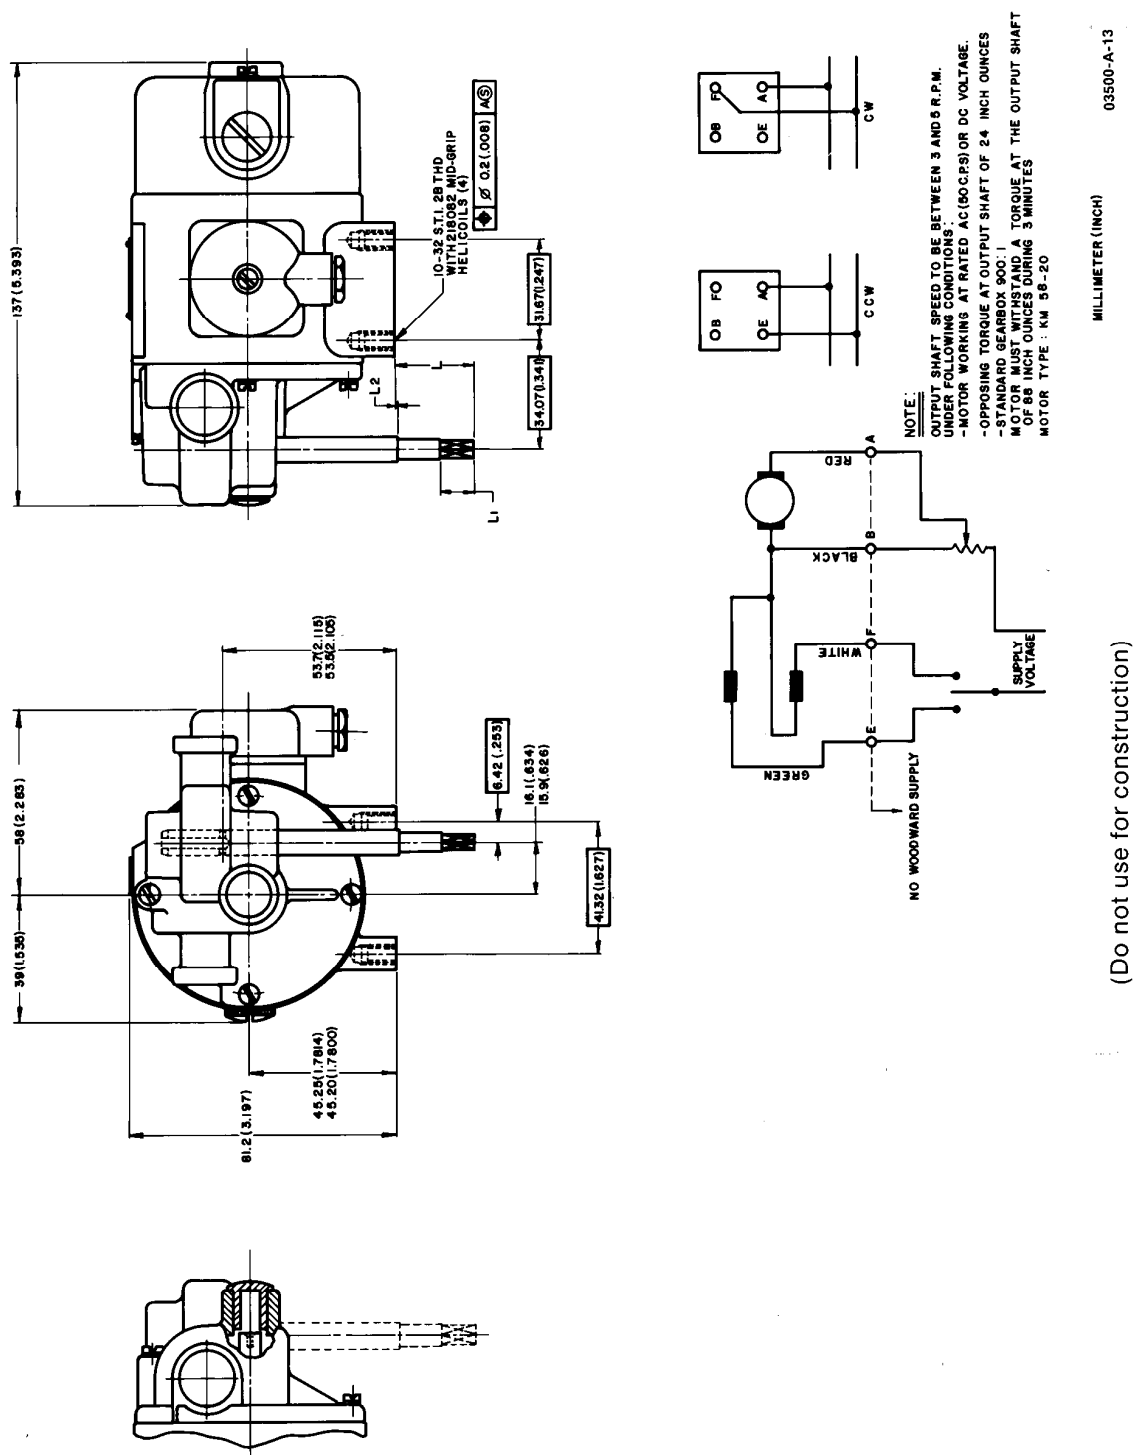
Outline Drawing of Groschopp Universal Type Motor with Motor Shaft Tabulation
